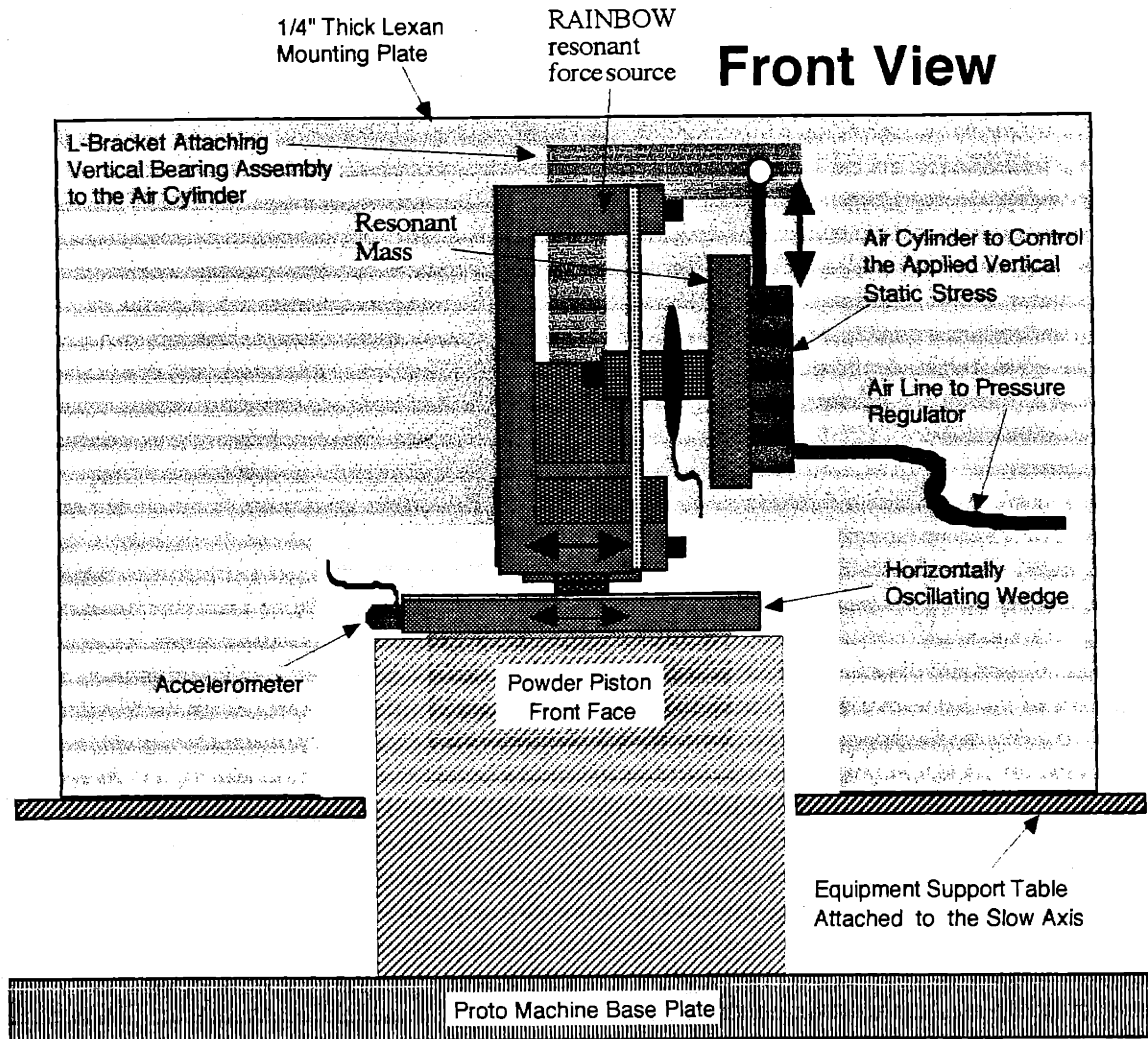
A front view of the new densification apparatus as mounted on the prototype 3DP machine.
